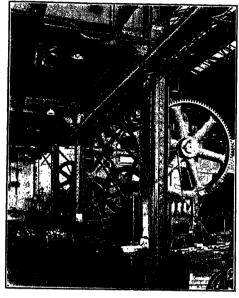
/2-H.P. Motor Operating Large Drawing Press
